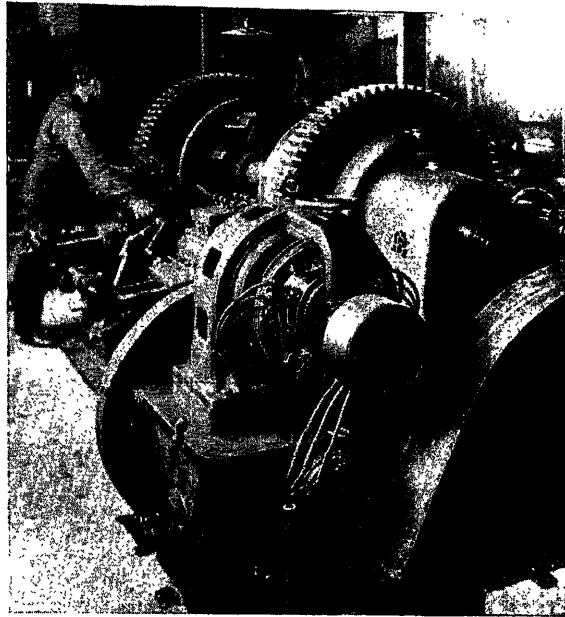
Three-phase Commutator Motor 24/8 h. p., driving a wheel-lathe.
